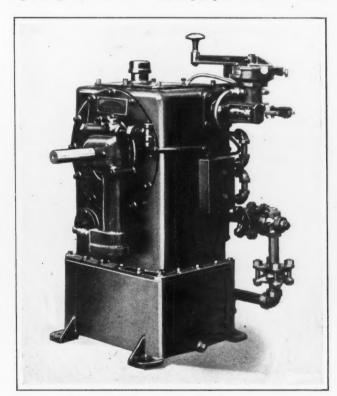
Rickert-Shafer Automatic Single-purpose Threading Machine
